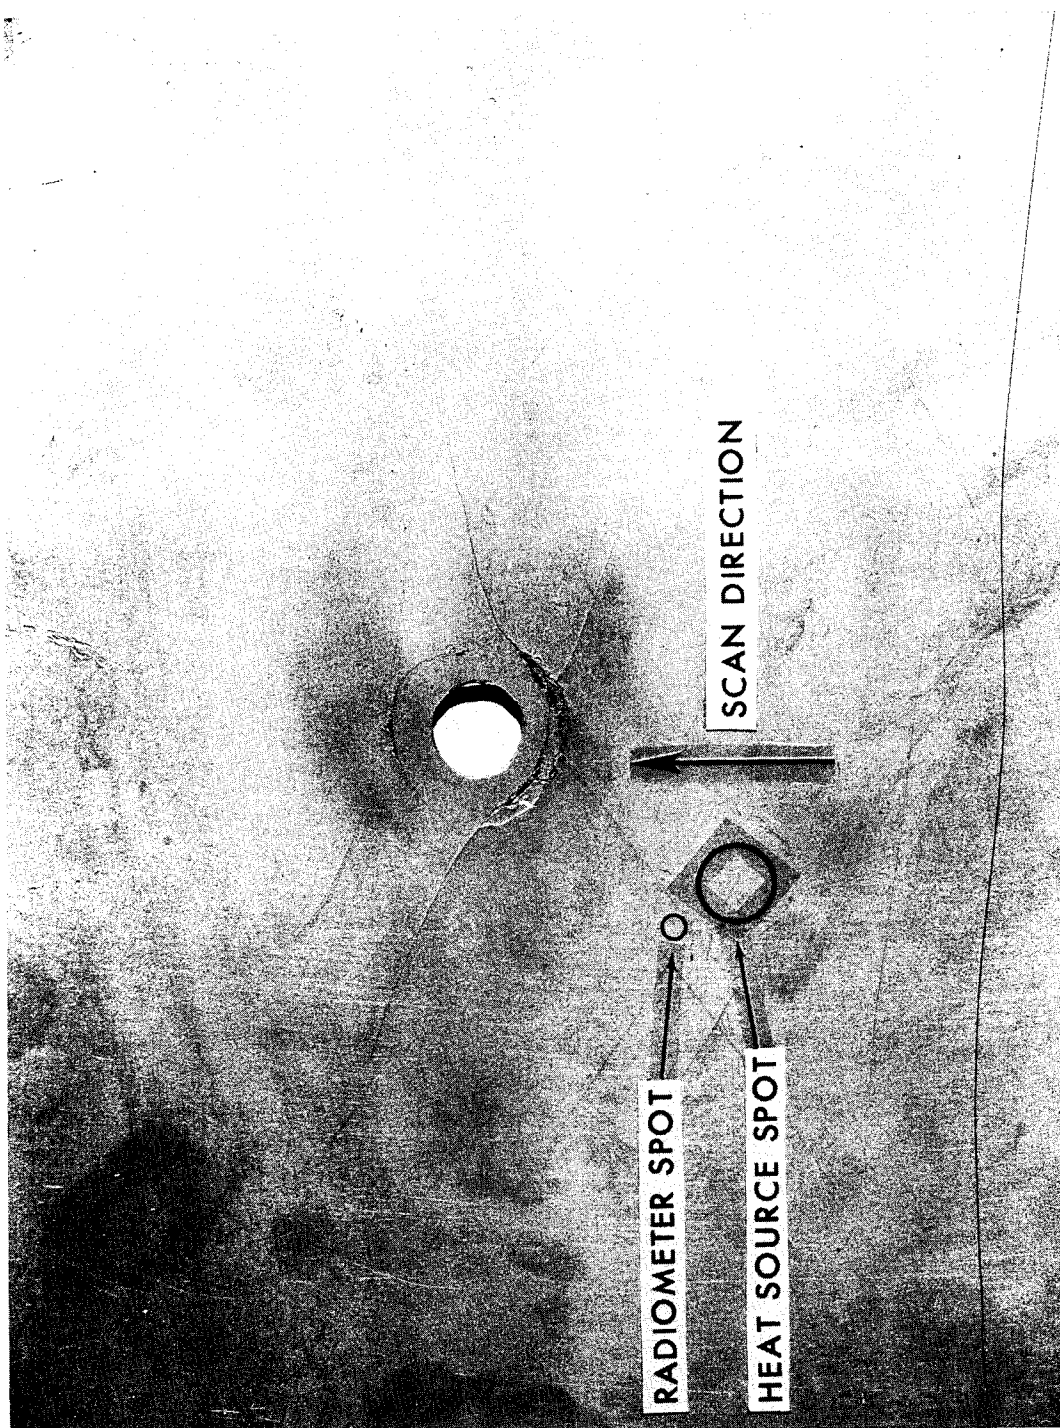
2X PHOTOGRAPH OF FATIGUE CRACKS AROUND HOLE
